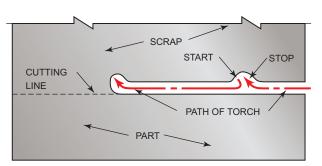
Turning out into scrap to make stopping and starting points smoother.
